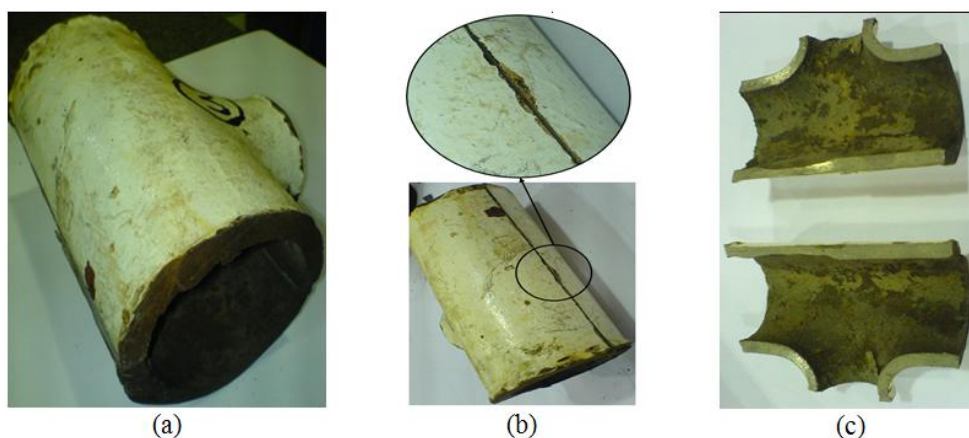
(a) The failed T-joint component (b) The leakage location and a zoomed in view (c) Two halves of tubular Joint
